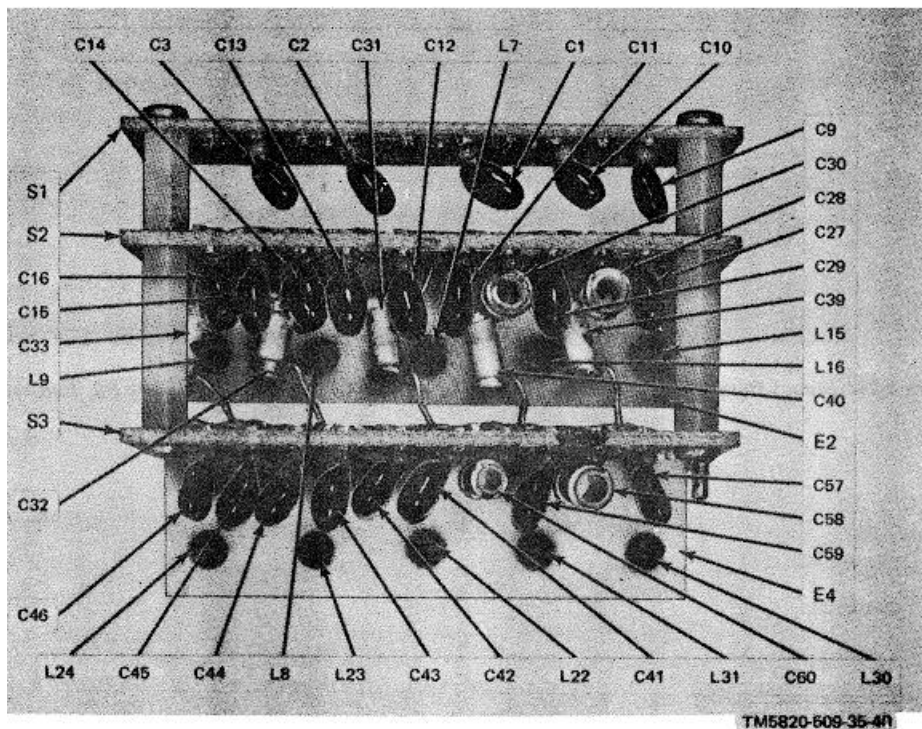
Signal Data Translator CV-1377A/PRC-47 (A8A4), Switch Assemblies S1, S2, and S3, Bottom View, Card Assemblies E2 and E4.
